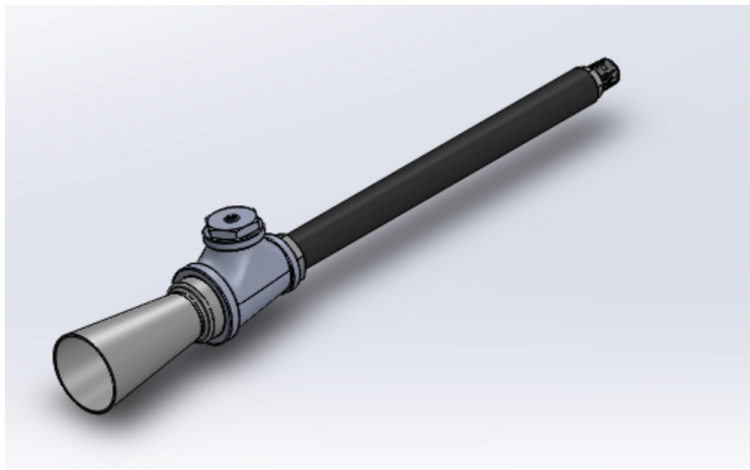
SolidWorks model of the coolant lines, connecting to the EGR cooler (bottom left) and the external chiller of the test cell (top right). Its to be noted that the black, thin, pipe represents a flexible, and much longer, coolant hose.
